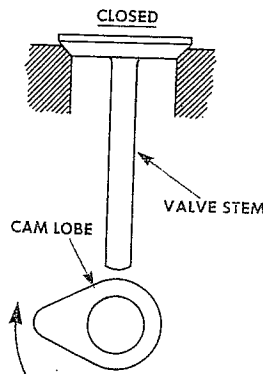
The stem is on the small part of the lobe so the valve is closed.
